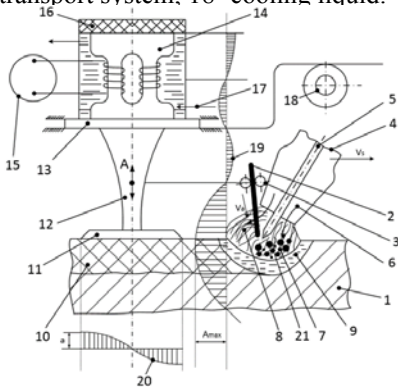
Scheme introducing ultrasonic welding bath at right angles to the direction of welding:
